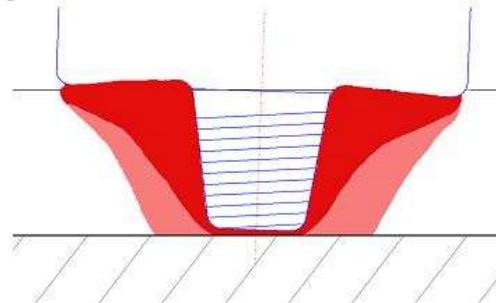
drawing showing the plunge depth and tilt of the tool [1]
